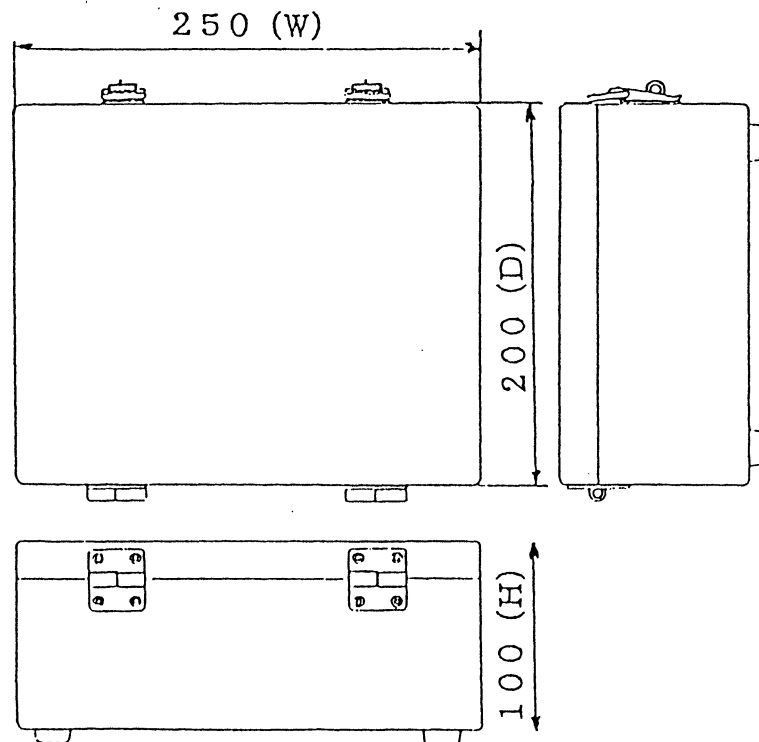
SME-8350 Dimensional Drawing (See Figure 23.)
